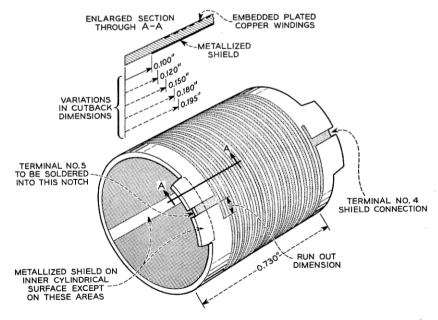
Side view of outer cylindrical spool, as per Fig. 6.
